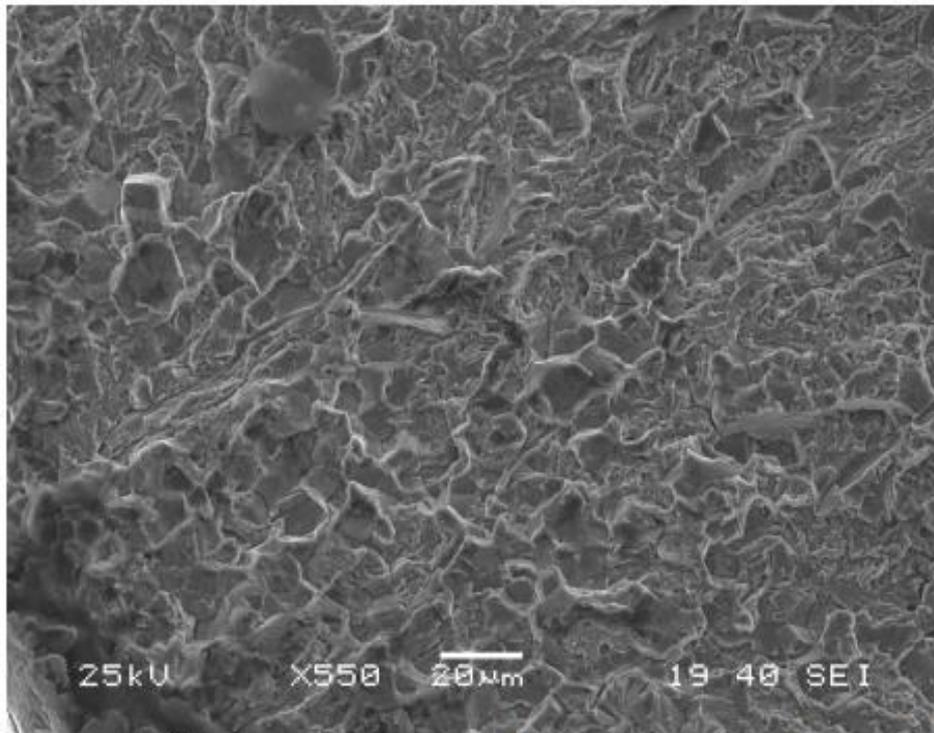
Idler gear shaft fracture surface case under SEM contains regions of intergranular fracture.
